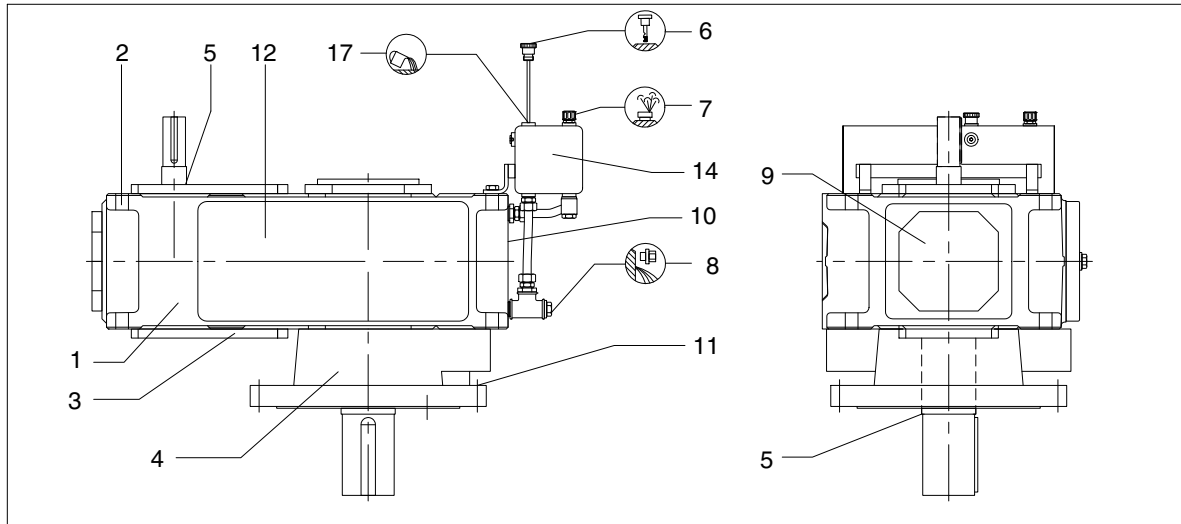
Gear unit with mounting flange (e.g. H3SV with oil-equalising tank)
